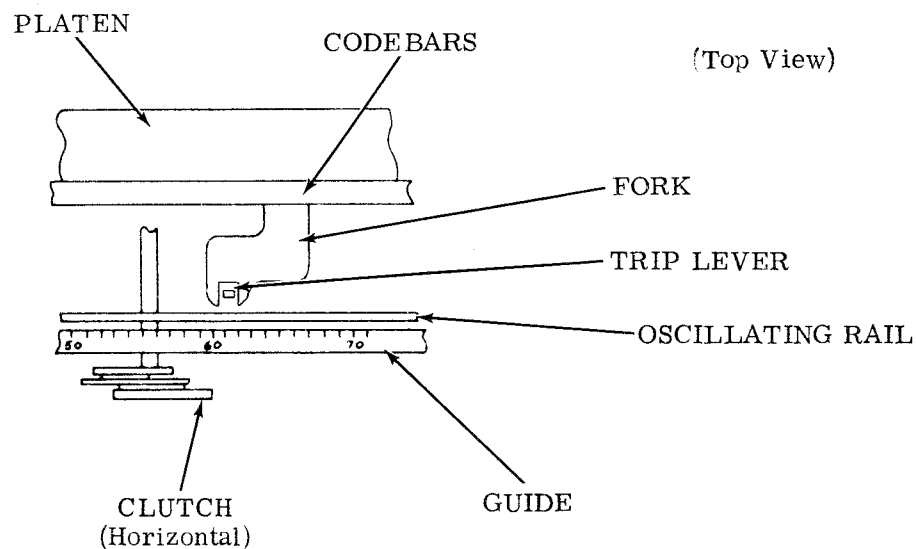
Codebar Fork and Clutch Trip Lever Alignment
